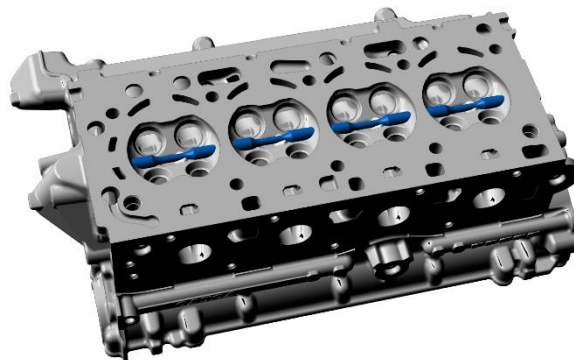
3D CAD rendering indicating the specimen extraction zones
